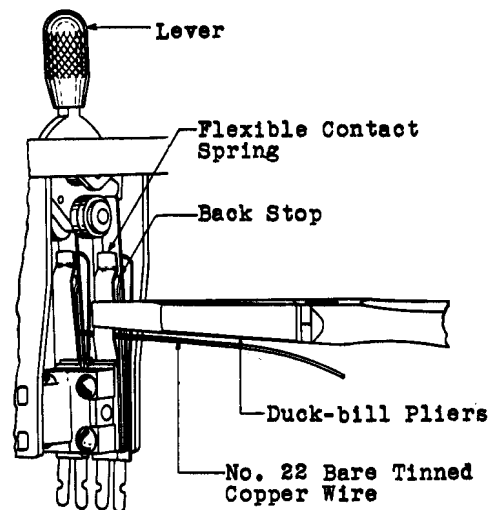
Method of Adjusting for Flexible Contact Spring Position
